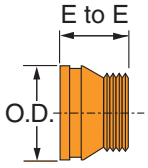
CONCENTRIC REDUCER GROOVE BY THREAD
